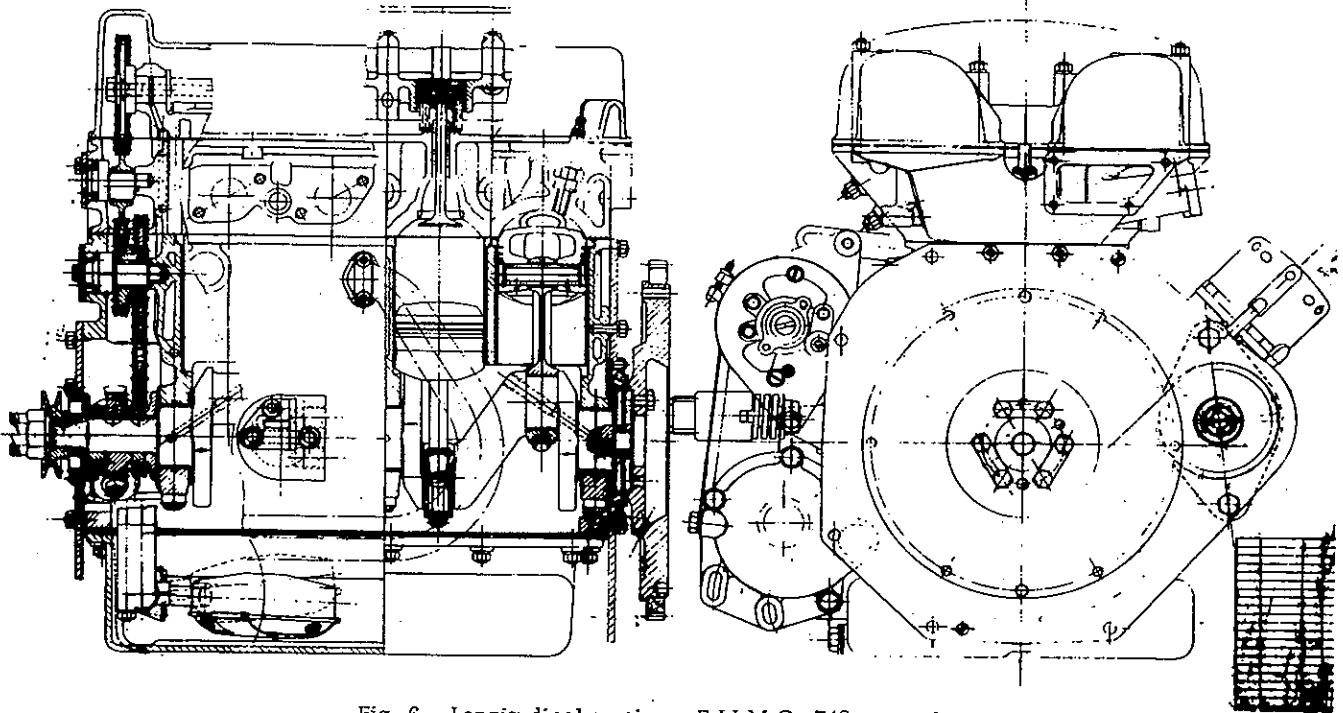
Longitudinal section - F.W.M.C. 742 cc engine
